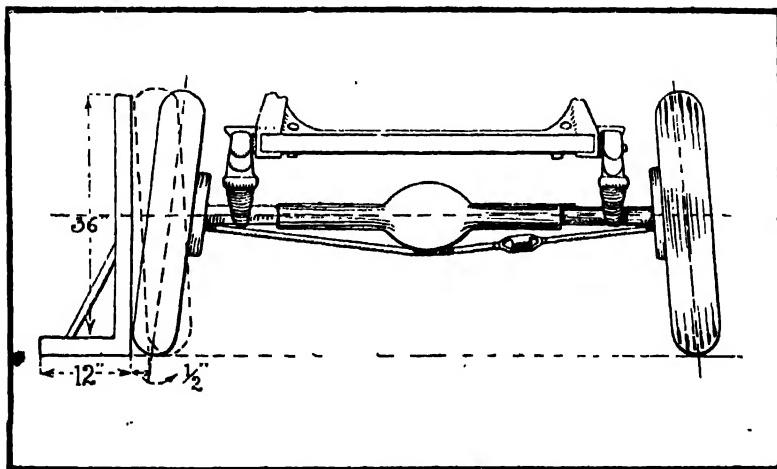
Method of Bracing Sprung Rear Construction by Truss Rod.
